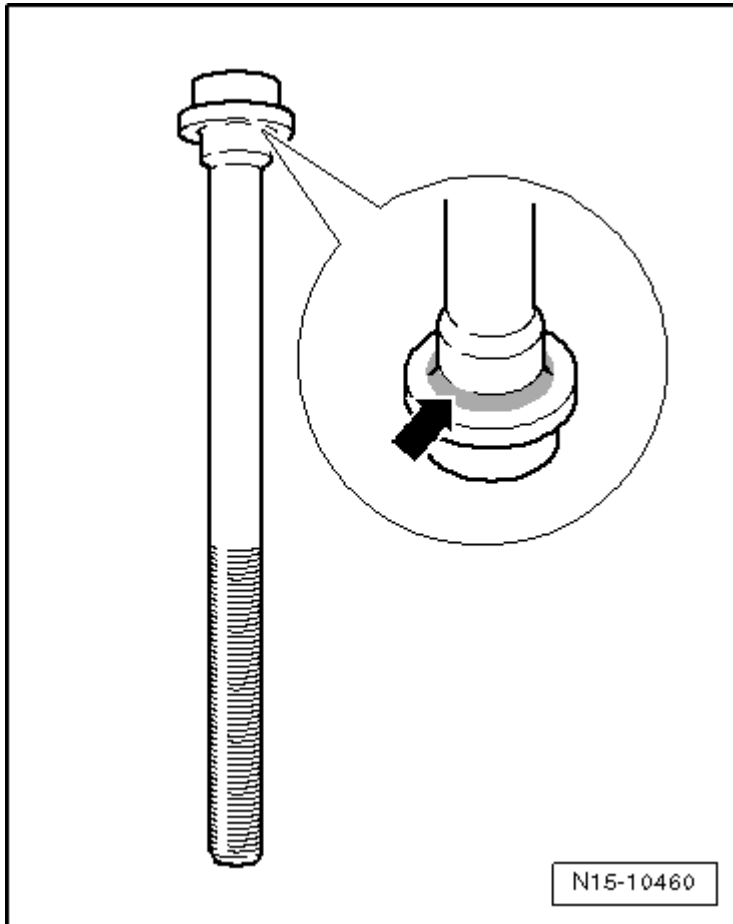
Applying Liquid Locking Fluid To Cylinder Head Bolt
